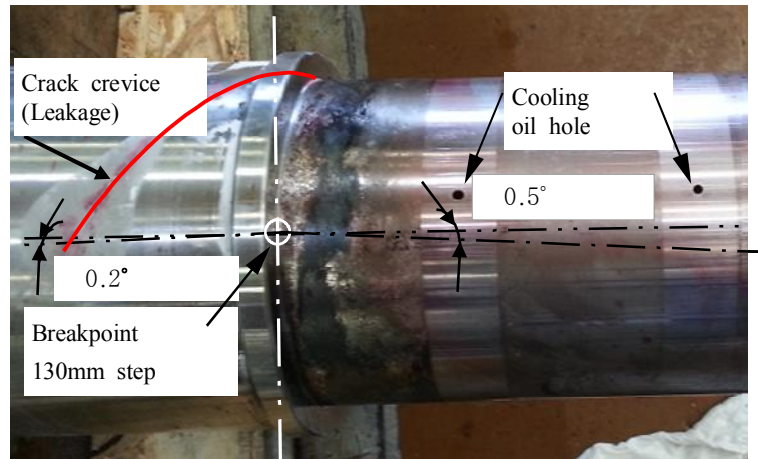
Massive oil leakage via cracked crevice, shaft bending under clutch engage order¹⁵⁾⁶⁾
